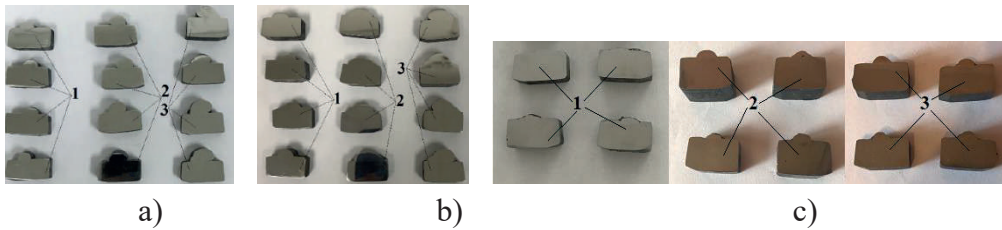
Samples after grinding: a - STOODY M7-G; b - STOODY 102-G; c - TUBRODUR 58 O / G M; 1 - single-layer surfacing; 2- two-layer surfacing; 3 - three-layer surfacing
